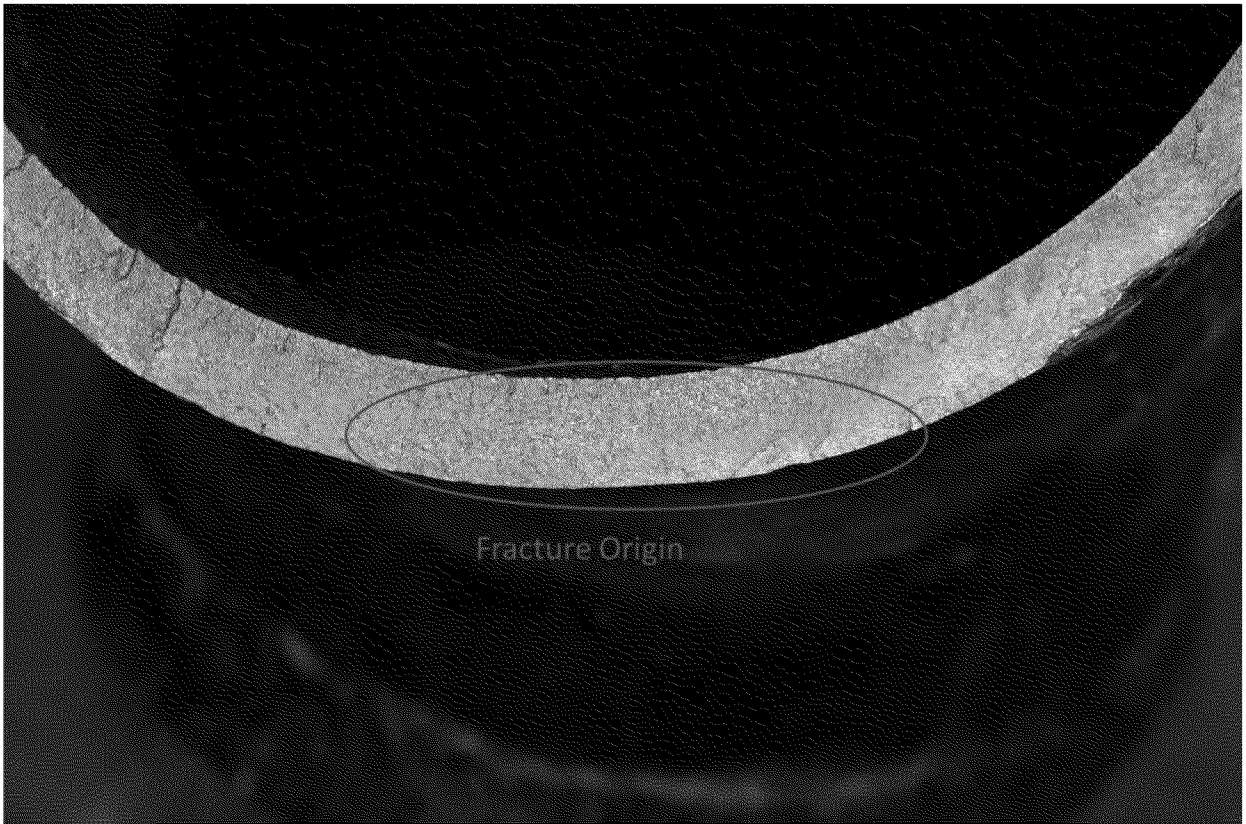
Image that shows the cleaned fracture surface with the fracture origin indicated.
